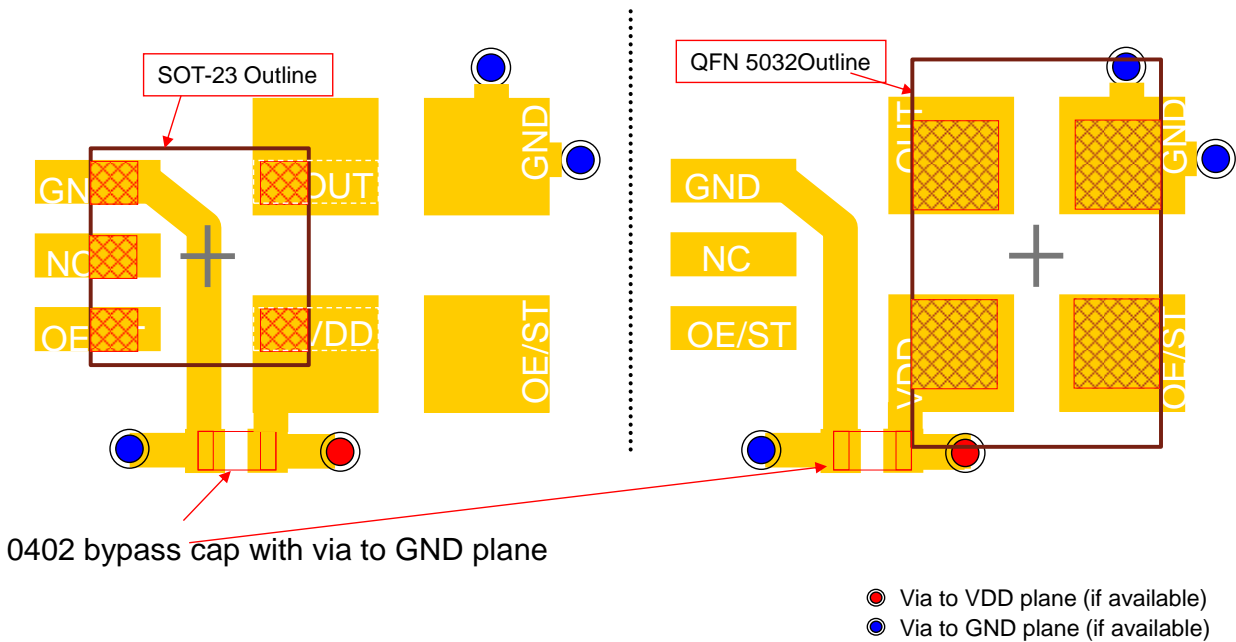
QFN 5032 and SOT23-5 co-planar design layout example showing placement of both QFN 5032 and SOT23-5 devices
